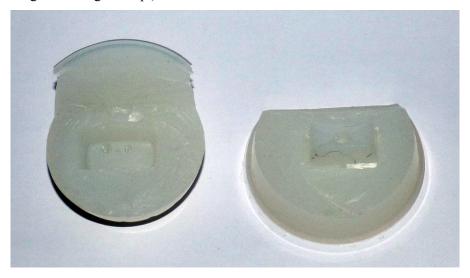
The silicon rubber mold for the key cap was cast in one piece and later cut open with a sharp knife.
